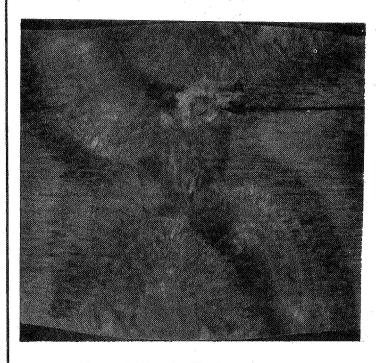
SECTION NO. 15 /1-2 CUT NO. Face
